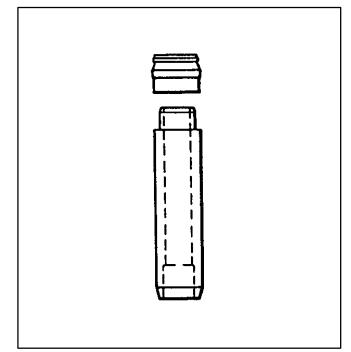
VALVE GUIDE AND OIL SEAL
